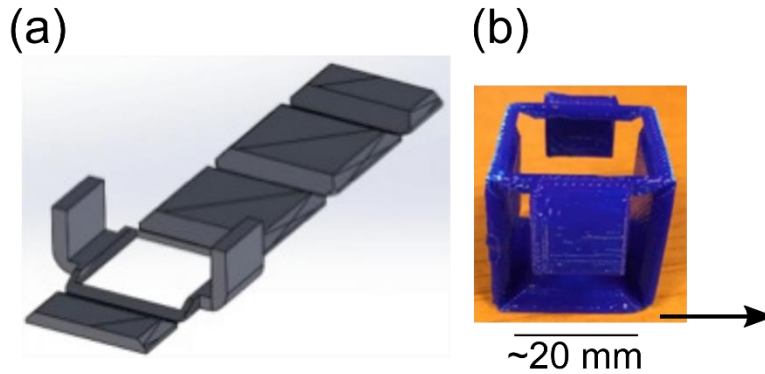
Sample holder (deformable cube) prototype. (a) CAD drawing of the deformable cube. (b) the finished sample holder cube; deformable by the application of force in the direction of the black arrow.
